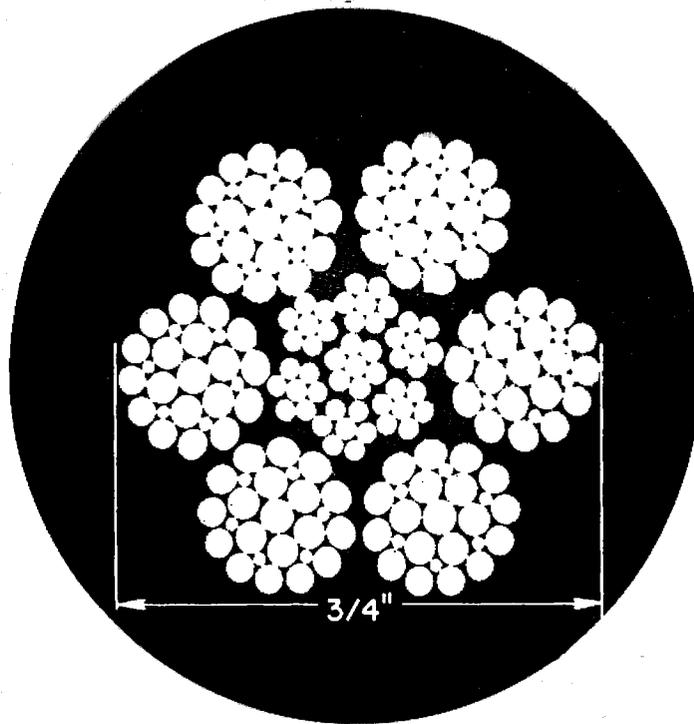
Cross-sectional view of the 3/4-in. diameter, stainless steel wire rope of 6 × 19 (7 × 7 IWRC) construction with filler wire [10]
